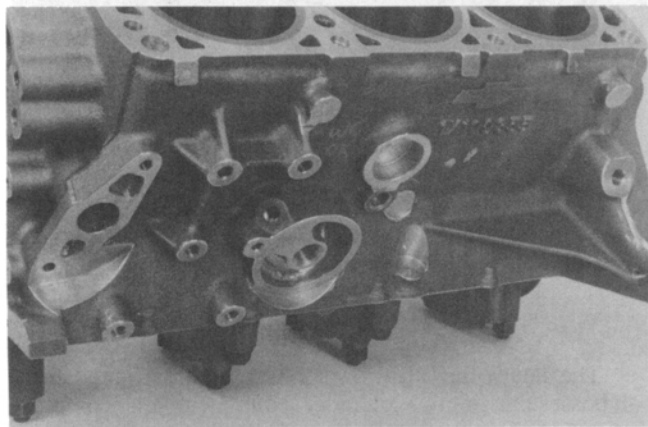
Aluminum block is cast with front-wheel-drive and rear-wheel-drive motor mount bosses. Note production mechanical fuel pump mount. Oil filter bypass is deleted from oil filter pad.
